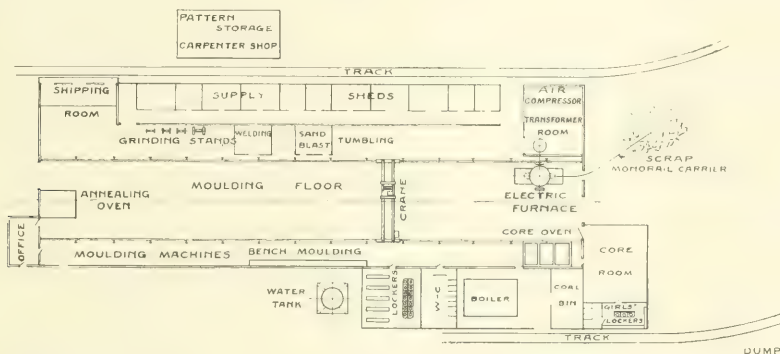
PLAN OF TYPICAL ELECTRIC STEEL FOUNDRY FOR SMALL CASTINGS
